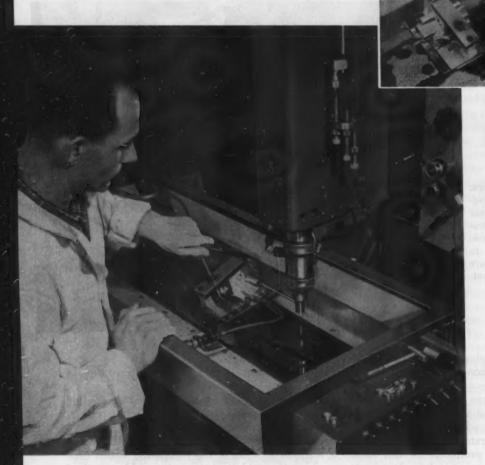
Electrical-discharge machining setup has a tank built around a milling-machine table so that a dielectric oil submerges the work, quenching the spark and carrying away debris. The work-head has a servo feed.
